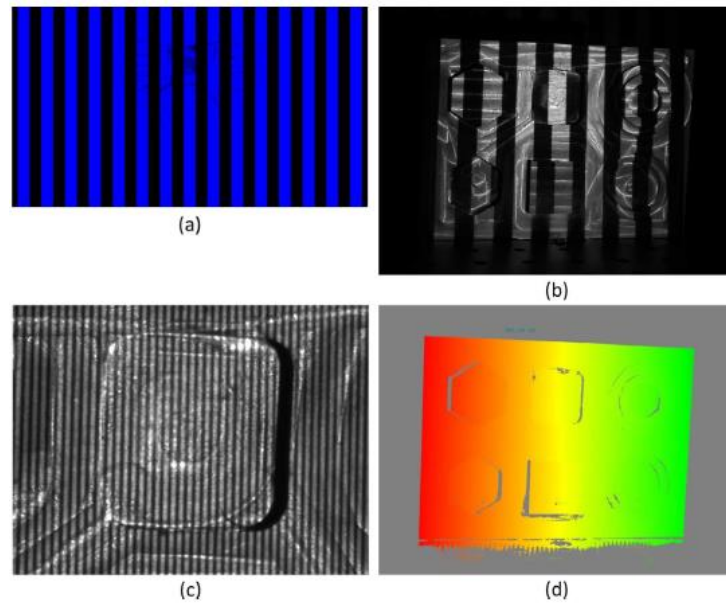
Inspection of aluminium part using the proposed adjusting fringe pattern method; a) Adapted pattern; b) Projection of stripes; c) details under projection with high frequency adapted stripe pattern; d) Absolute phase map [35]
